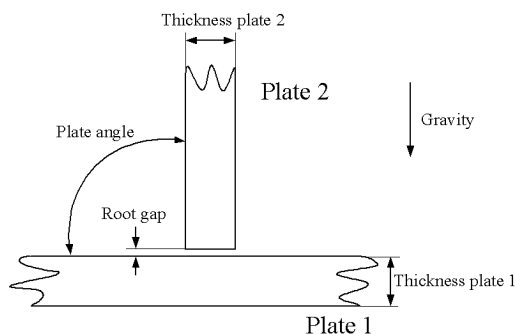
T-joint to be welded showing geometrical workpiece parameters.
